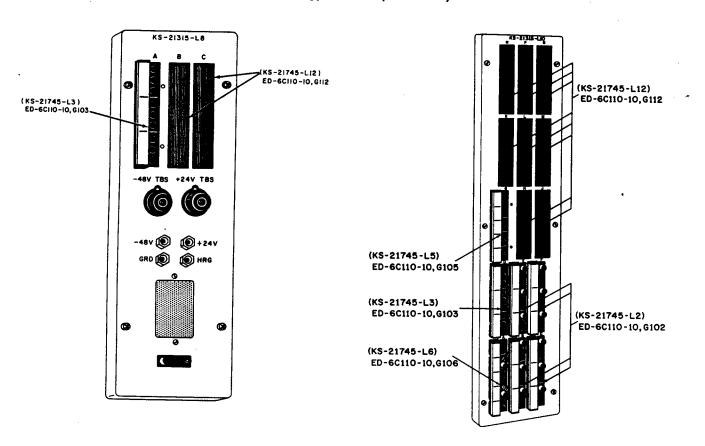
ED-6C110-10, G8 Test/Talk Panel For Modular Protector Frames (Front View)
